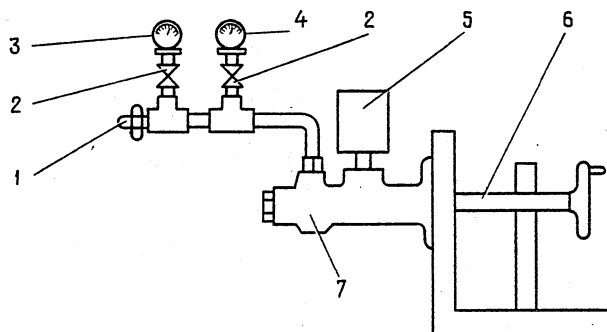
Checking the Front Sealing Ring for Tightness:
